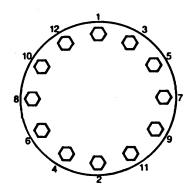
Flywheel Bolt Tightening Sequence.
